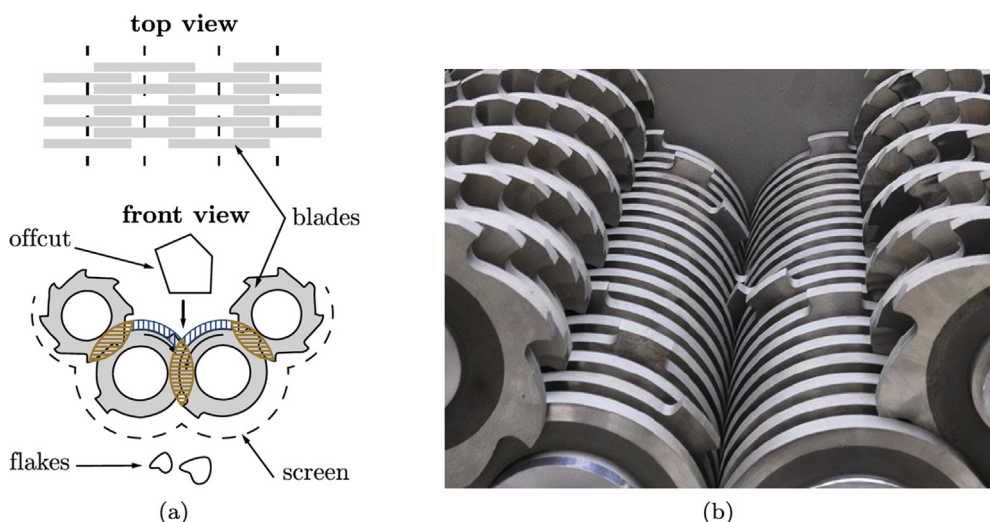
Schematics of a multiple shaft shredder (four-shafts): a) top and front views; b) inside view of a four-shaft shredder (reprinted from Vincent et al. [33] with permission of Elsevier).
